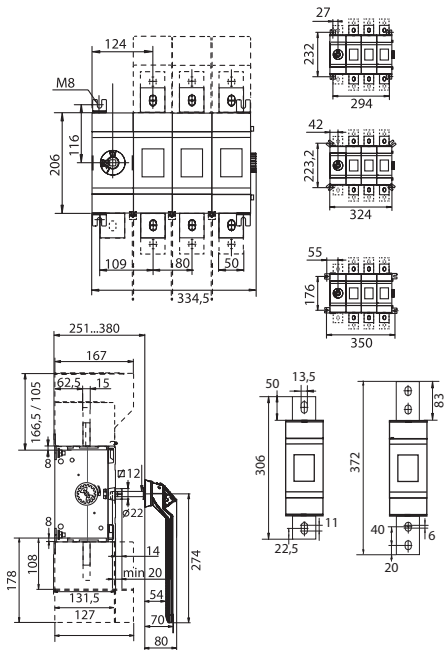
Overall and installation dimensions of 1000-1600 A 3P switch disconnectors
